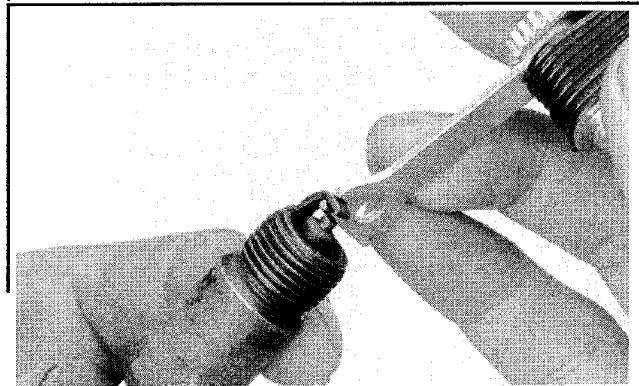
Most plug gapping tools have an adjusting fitting used to bend the ground electrode
